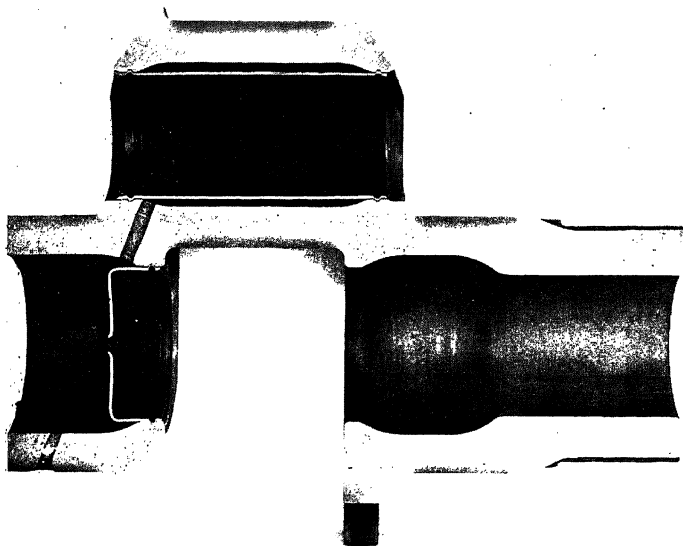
Section of Mercedes-Benz D.B. 601N, showing structure.
